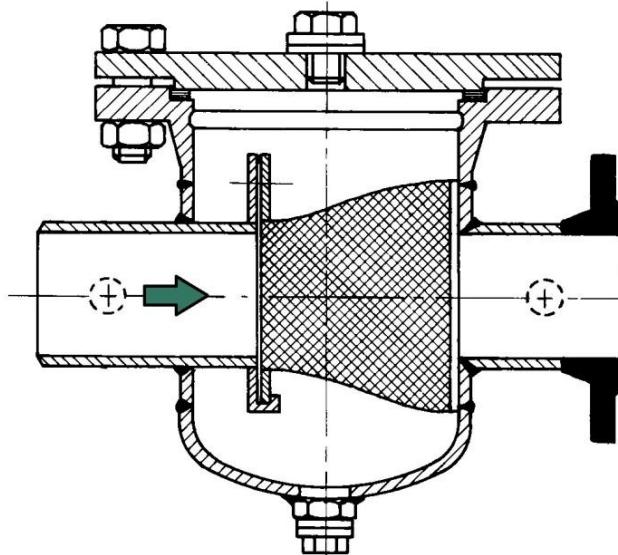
W-FILTER: type SF (welded / flanged end)
